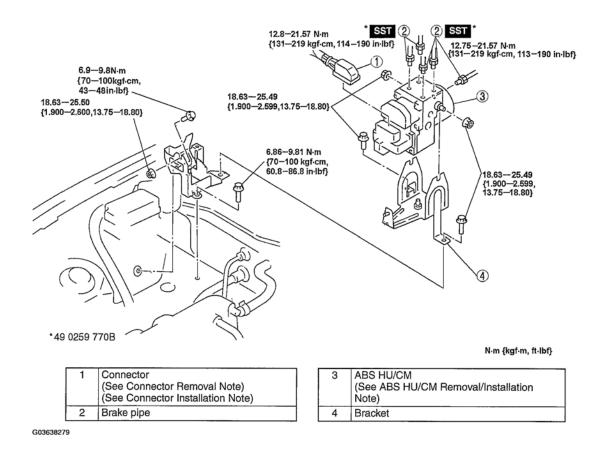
Exploded View Of ABS HU/CM & Torque Specifications Courtesy of MAZDA MOTORS CORP.
